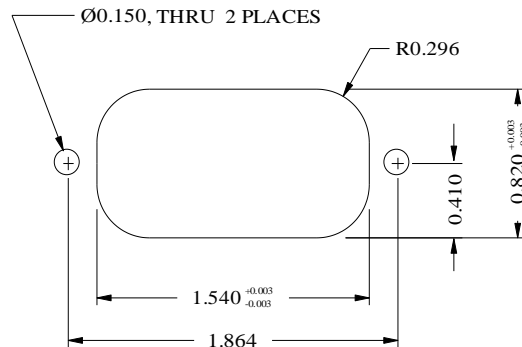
PANEL CABLE CONNECTOR MOUNTING HOLE
